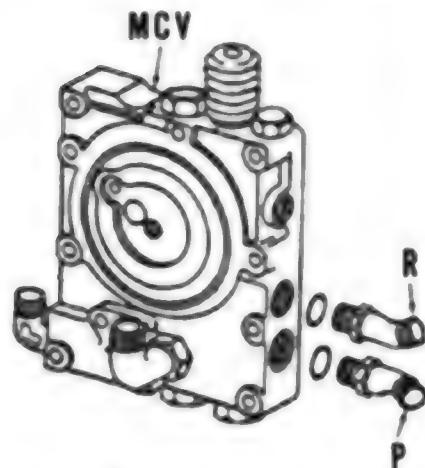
View showing pressure and return ports from MCV to the hydraulic lift.
